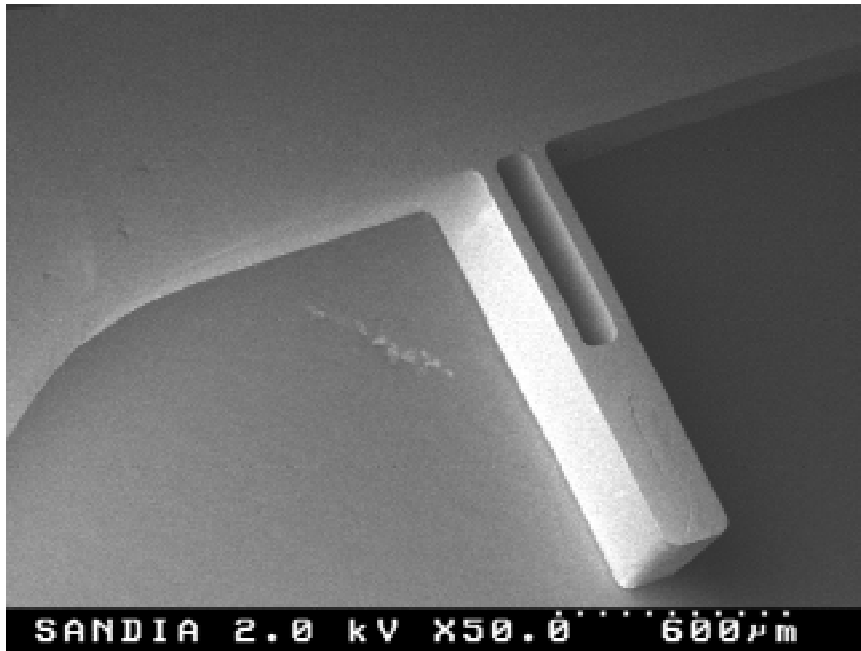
NiFe tensile test part made from SU 8 molds and UV proximity printing. The SU8 mold was 350 µm thick and the SU8 was stripped using a K-10 (Kolene Corp.) molten salt process bath at 320°C in approximately 30 min.
